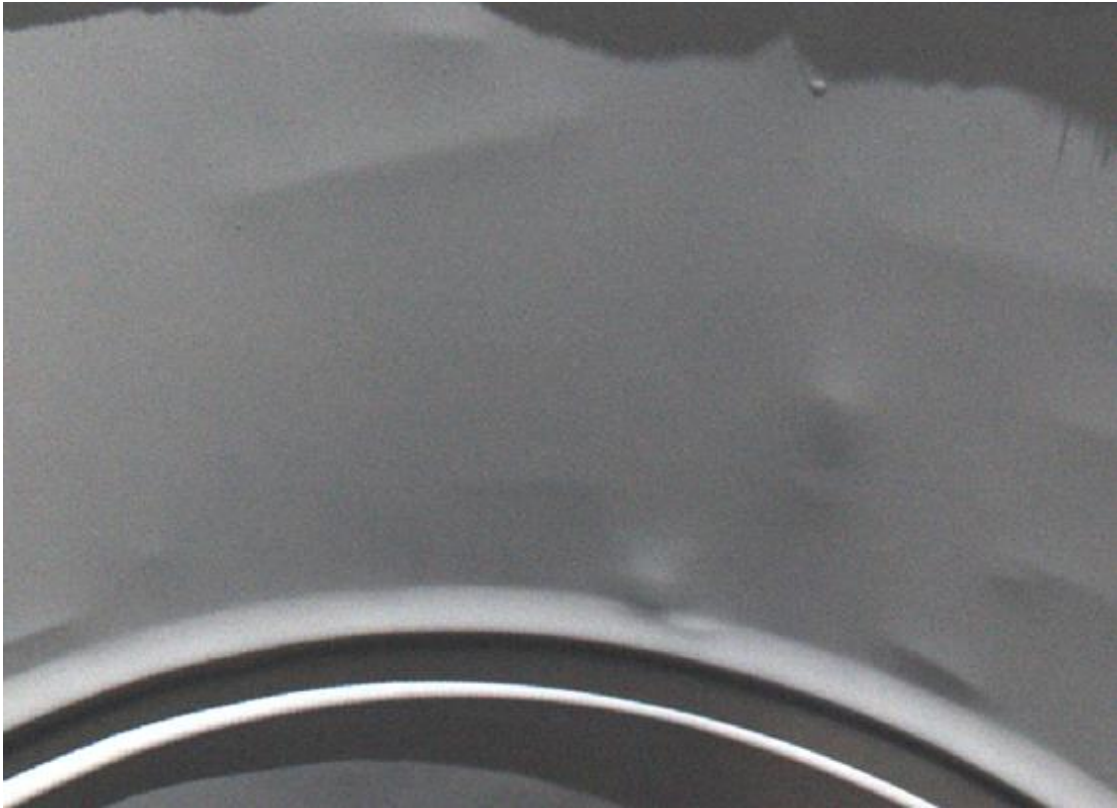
Shown is a sample of the photographic documentation collected from inspection of the test environment.
